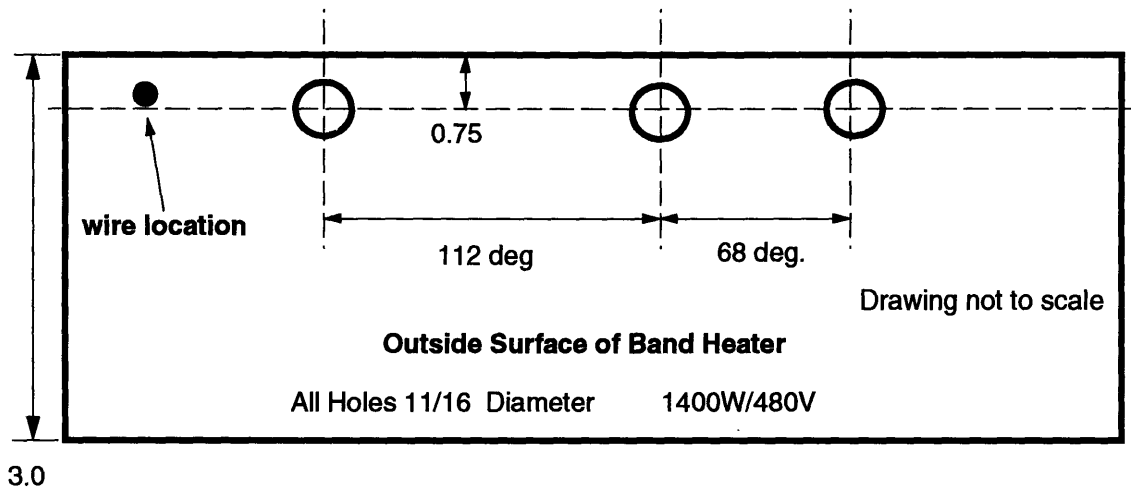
Gear Pump Outlet Flange/Crosshead Adapter Flange Band Heater.
